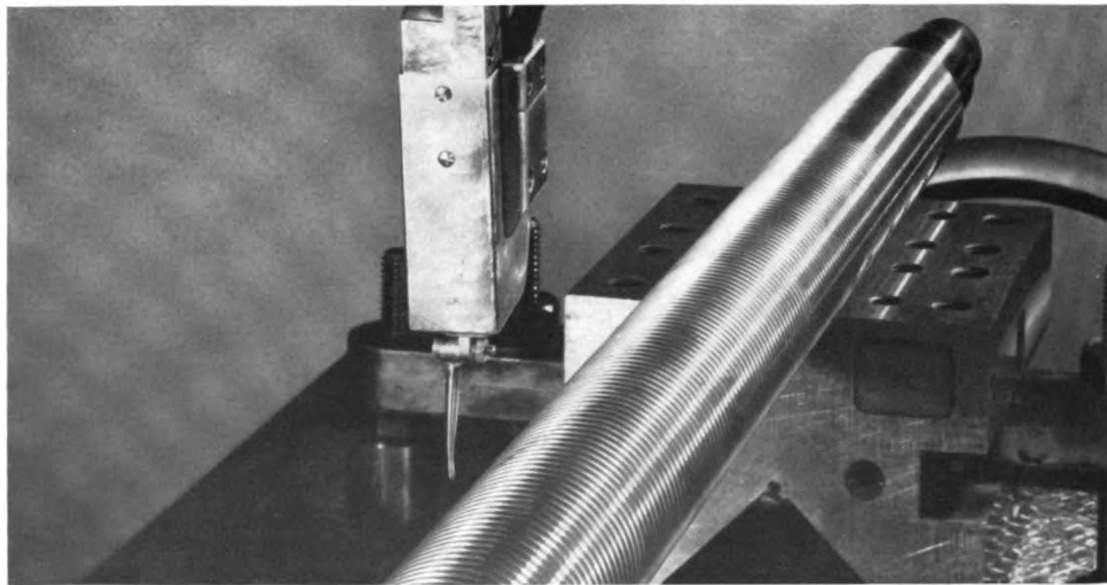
Work must be cleared by table movement before indicating adjacent thread.
